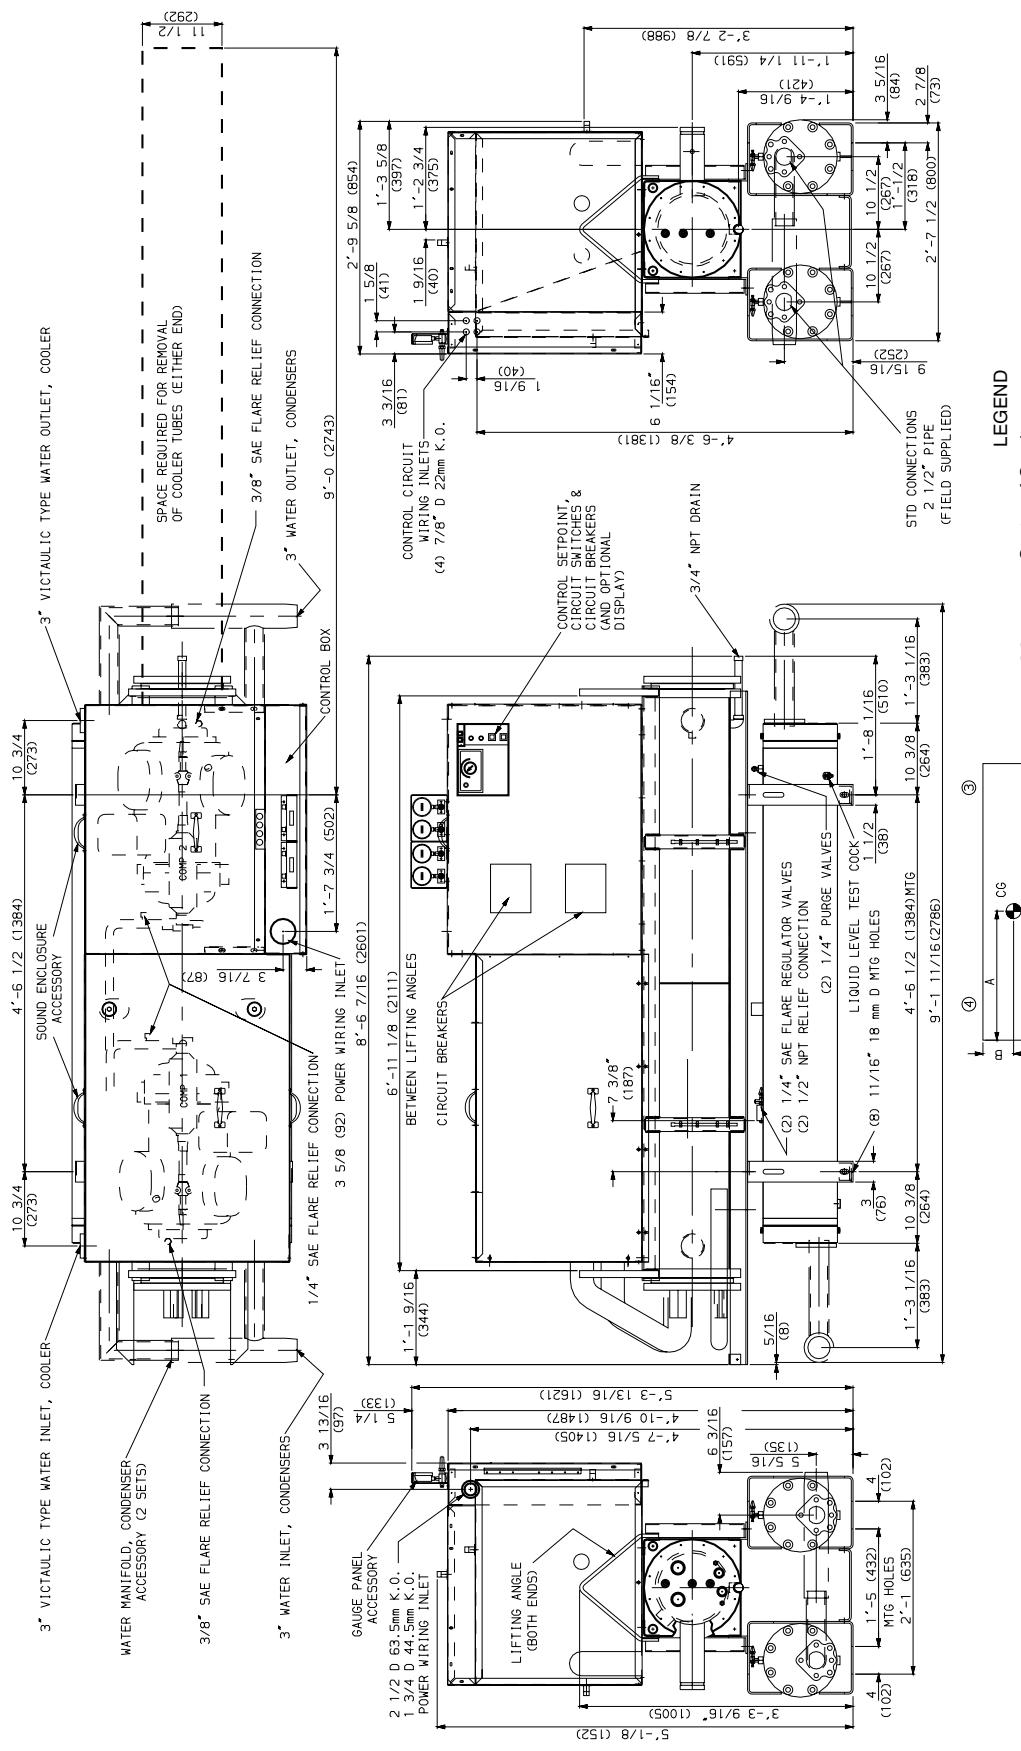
Dimensions, 30HK050,060 (Fluid-Cooled)
